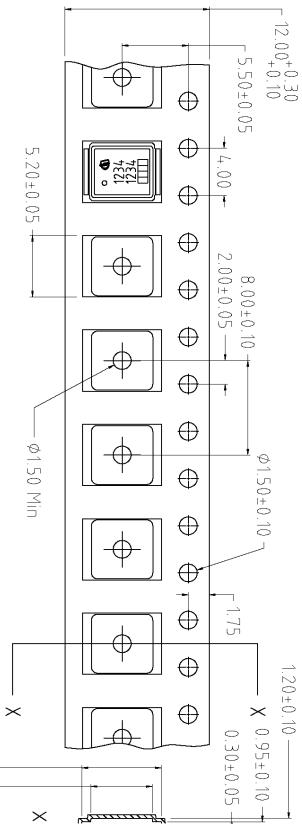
Outlines MG-WDSON-2, dimensions in mm/inches
